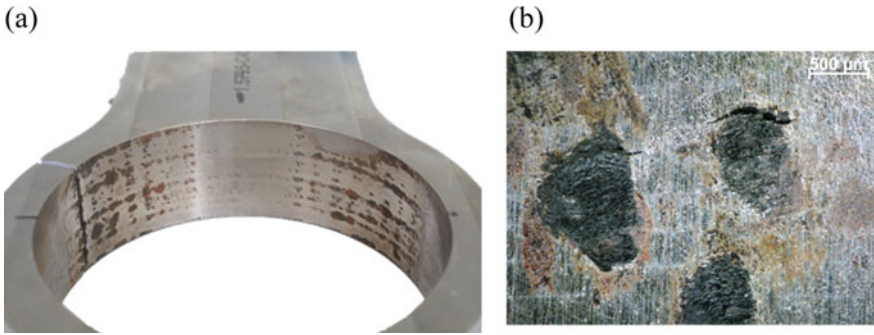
Fretting scars on a piston rod (a) and cracks induced by fretting fatigue (b)
